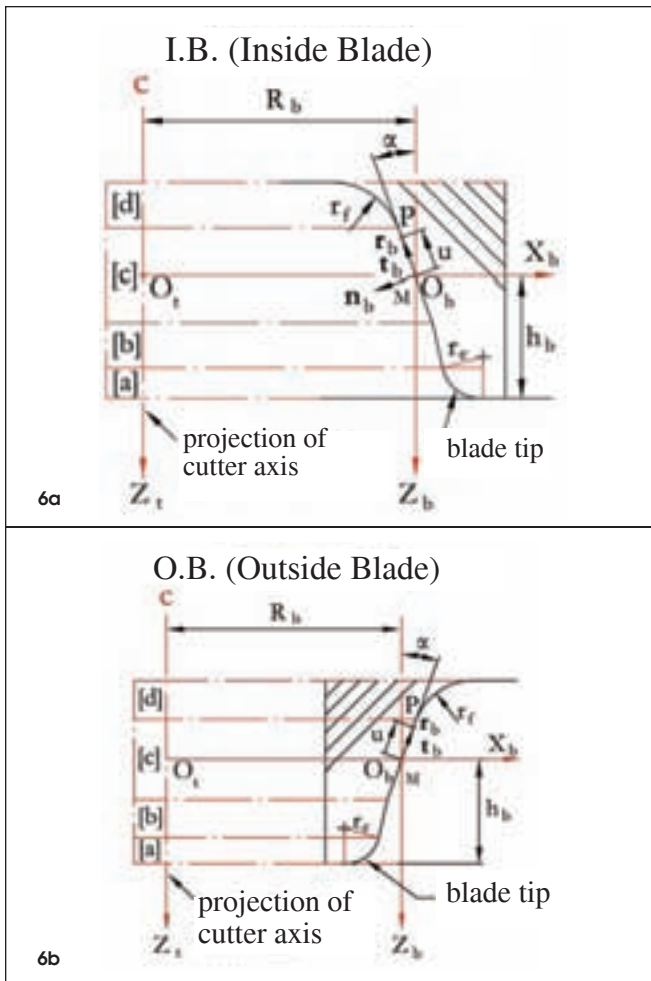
Basic geometry of blades. (a) Pinion tooth surfaces. (b) Gear tooth surfaces.
